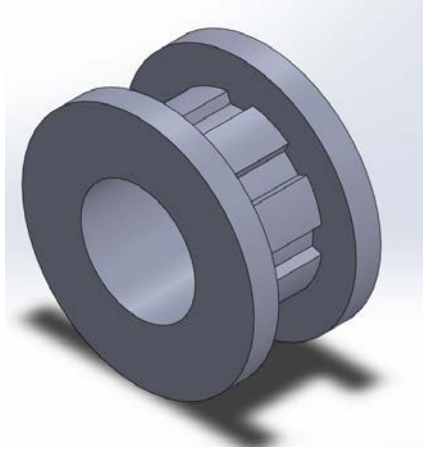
CAD of Pulley for Conveyor Drive Roller for Coupling with Hex Bar
